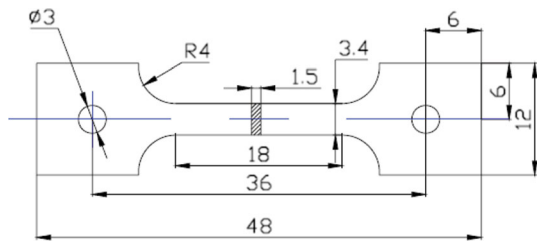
Dimension of tensile test sample (Reproduced from (Ref 9)). Tensile direction is parallel to extrusion direction (ED)
